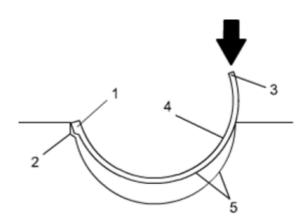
Identifying Bearing Installation Position Courtesy of SUZUKI OF AMERICA CORP.
